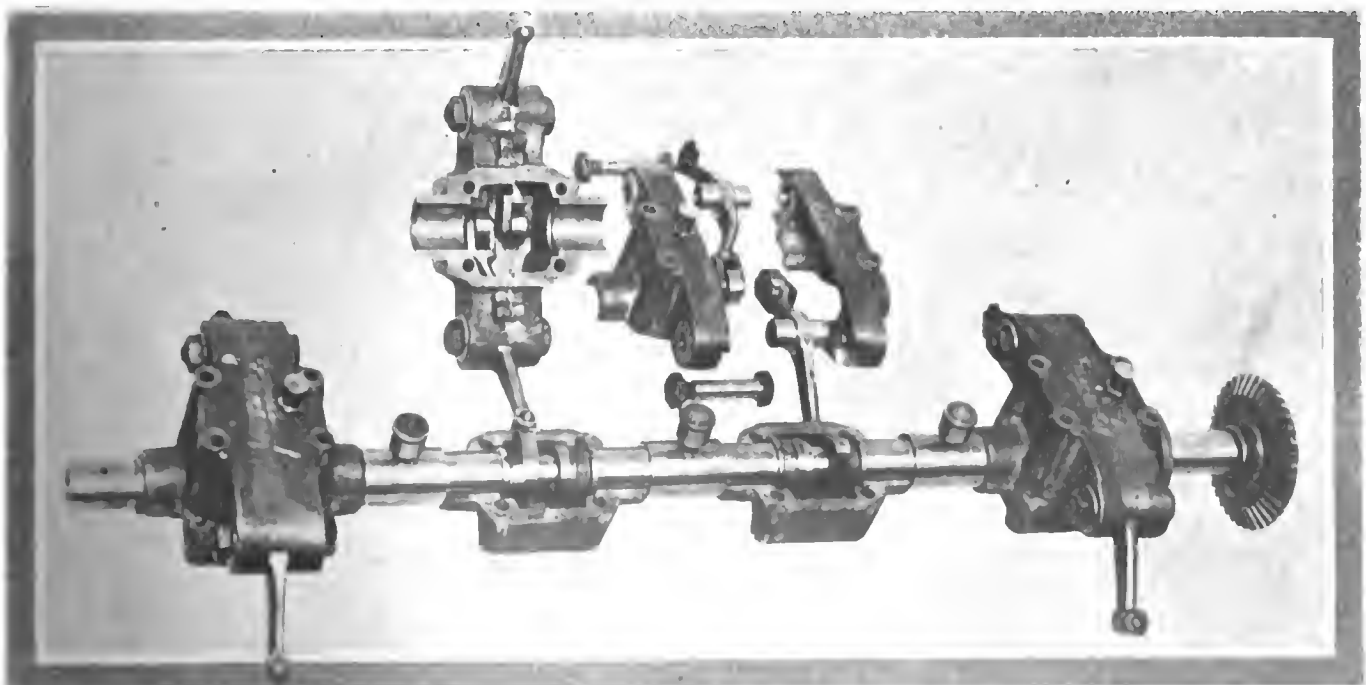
Showing details of camshaft rockerarm construction, with bevel gear for Models 40 and 50. Chain drive for Model 30 not shown
